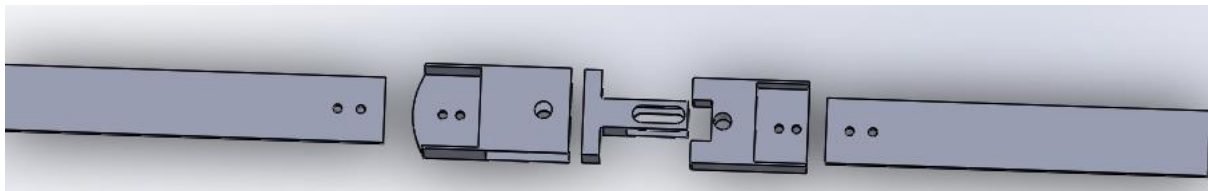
Model 2: Complete assembly including Side Braces, Joint and Lock
